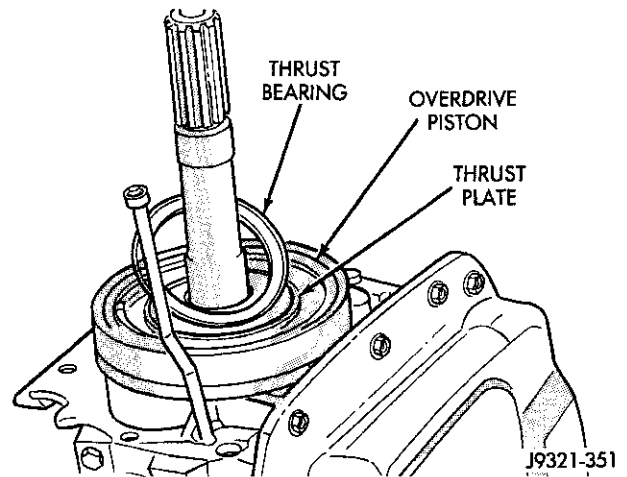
Overdrive Piston Thrust Bearing Removal/Installation
